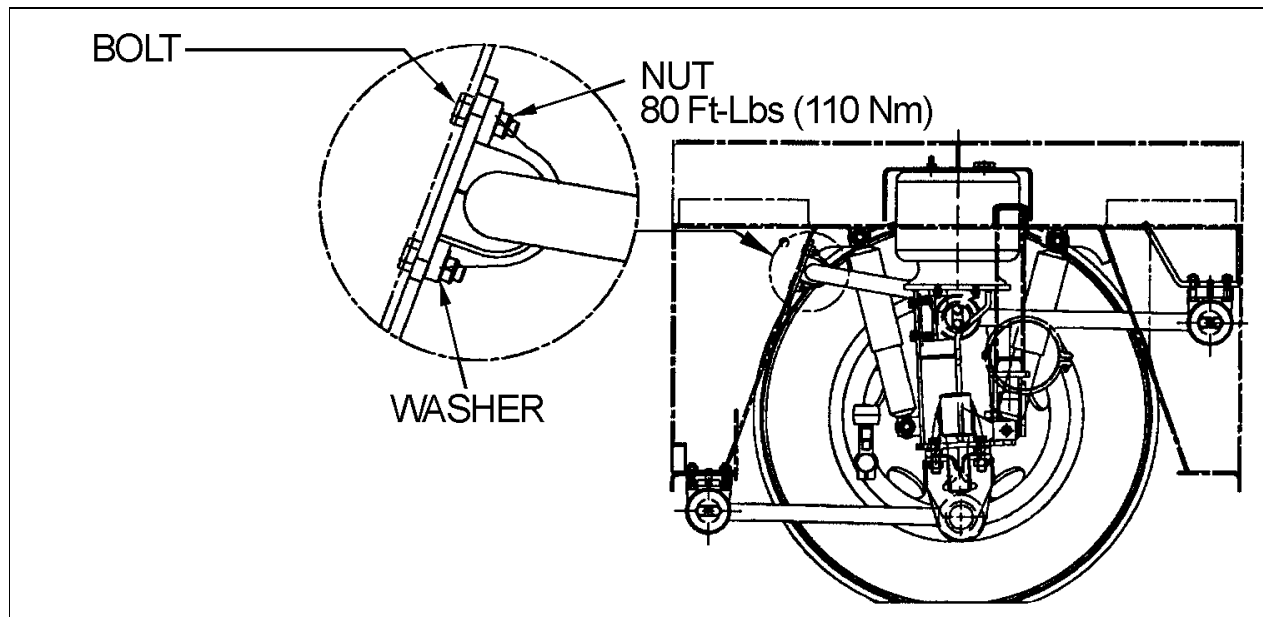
H3 COACHES EQUIPPED WITH I-BEAM FRONT AXLE
